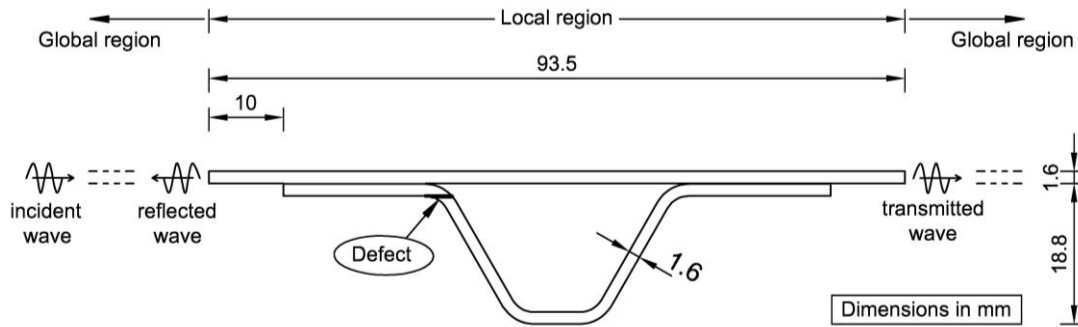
GL model of the composite skin-to-stringer assembly, with indication of the defect considered in this study.
